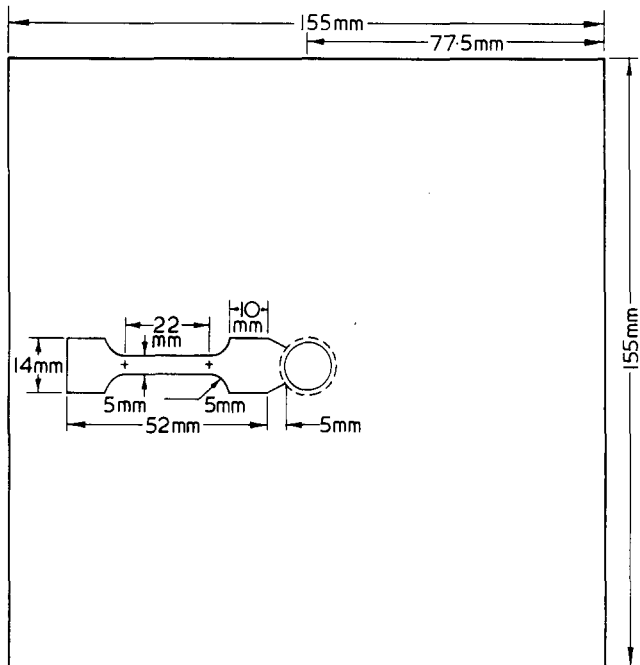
Dimensions of the mould. The thickness of the tensile test specimen is 1.5 mm. + denotes mark from the hardness tester
